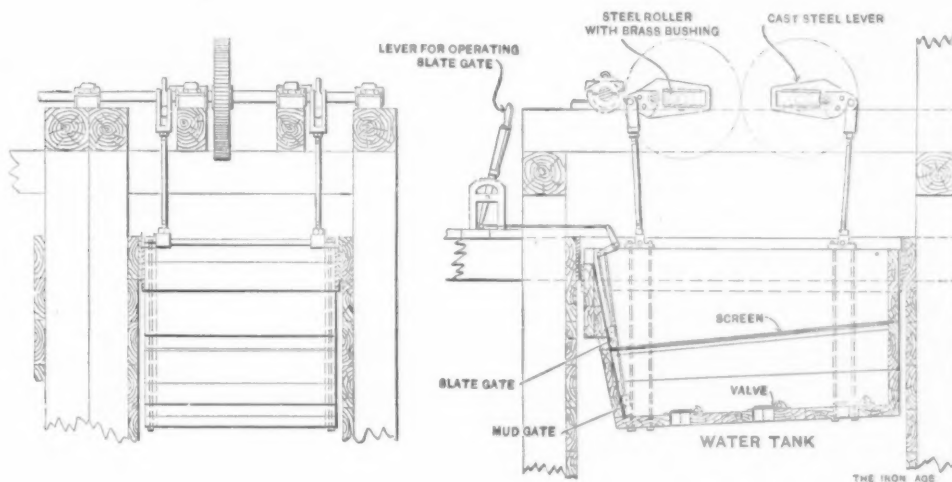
Details of the Jigs Used in the Pittsburgh Coal Washer.
